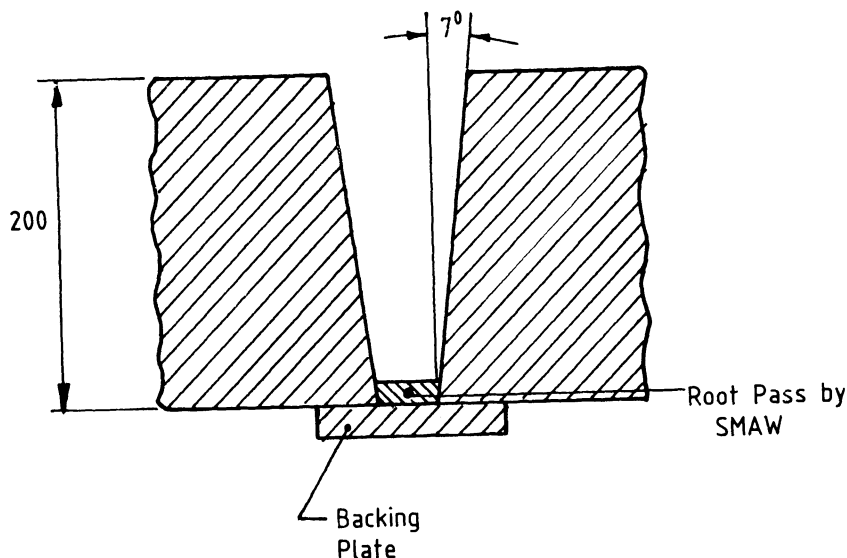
Typical Weld Geometry for Pressure Vessel Welding with Automatic SAW.
